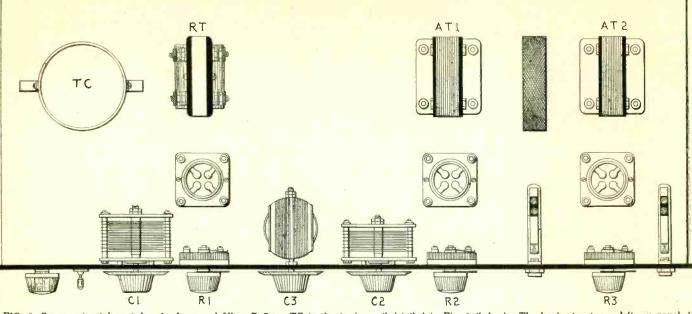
Constructional layout for the Improved Ultra Reflex. TC is the tuning coil detailed in Fig. 2 (below). The knob at extreme left, on panel, is for the tap switch (C4 in Fig. 1). Next is a battery switch Cl, 23-plate variable condenser; C2, 11-plate; C3, variocoupler; AT1 and AT2, audio transformers (separated by the choke coil shown in Fig. 3, below). R1, RF rheostat, for first tube; R2, rheostat for second or reflex tube; R3, rheostat for straight audio, or third tube. The other figures represent the three sockets and two jacks.
